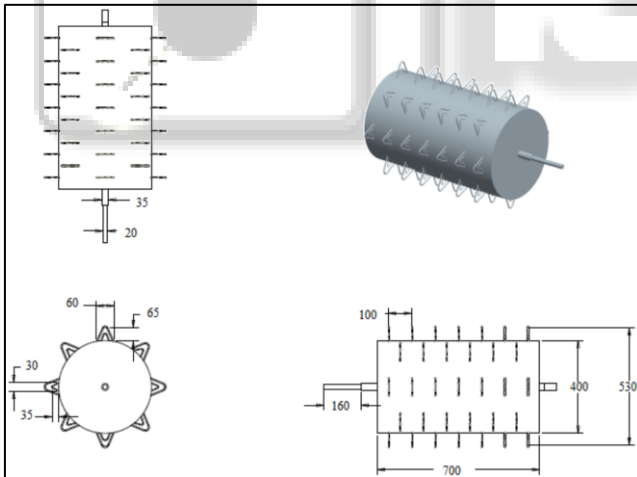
Front, Top, Side & Schematic View of Threshing Cylinder of Developed Thresher
